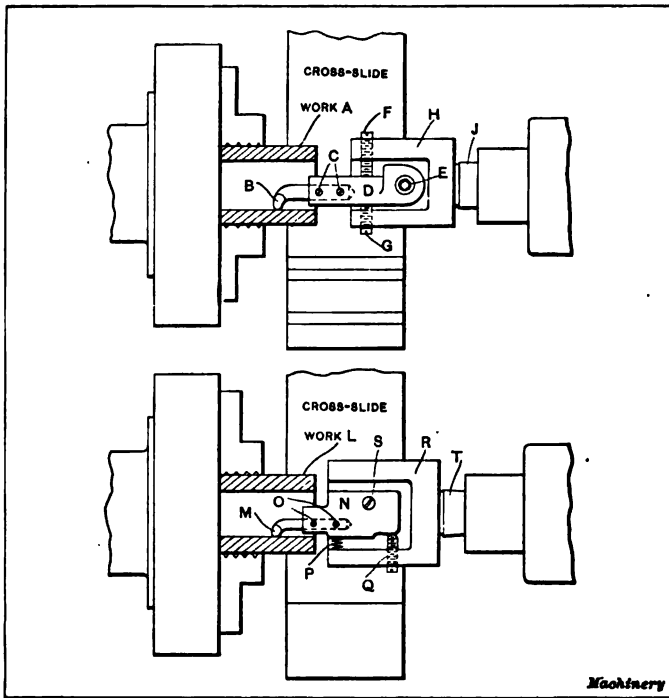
Two Types of Adjustable Boring Tools for Tool-room Work
